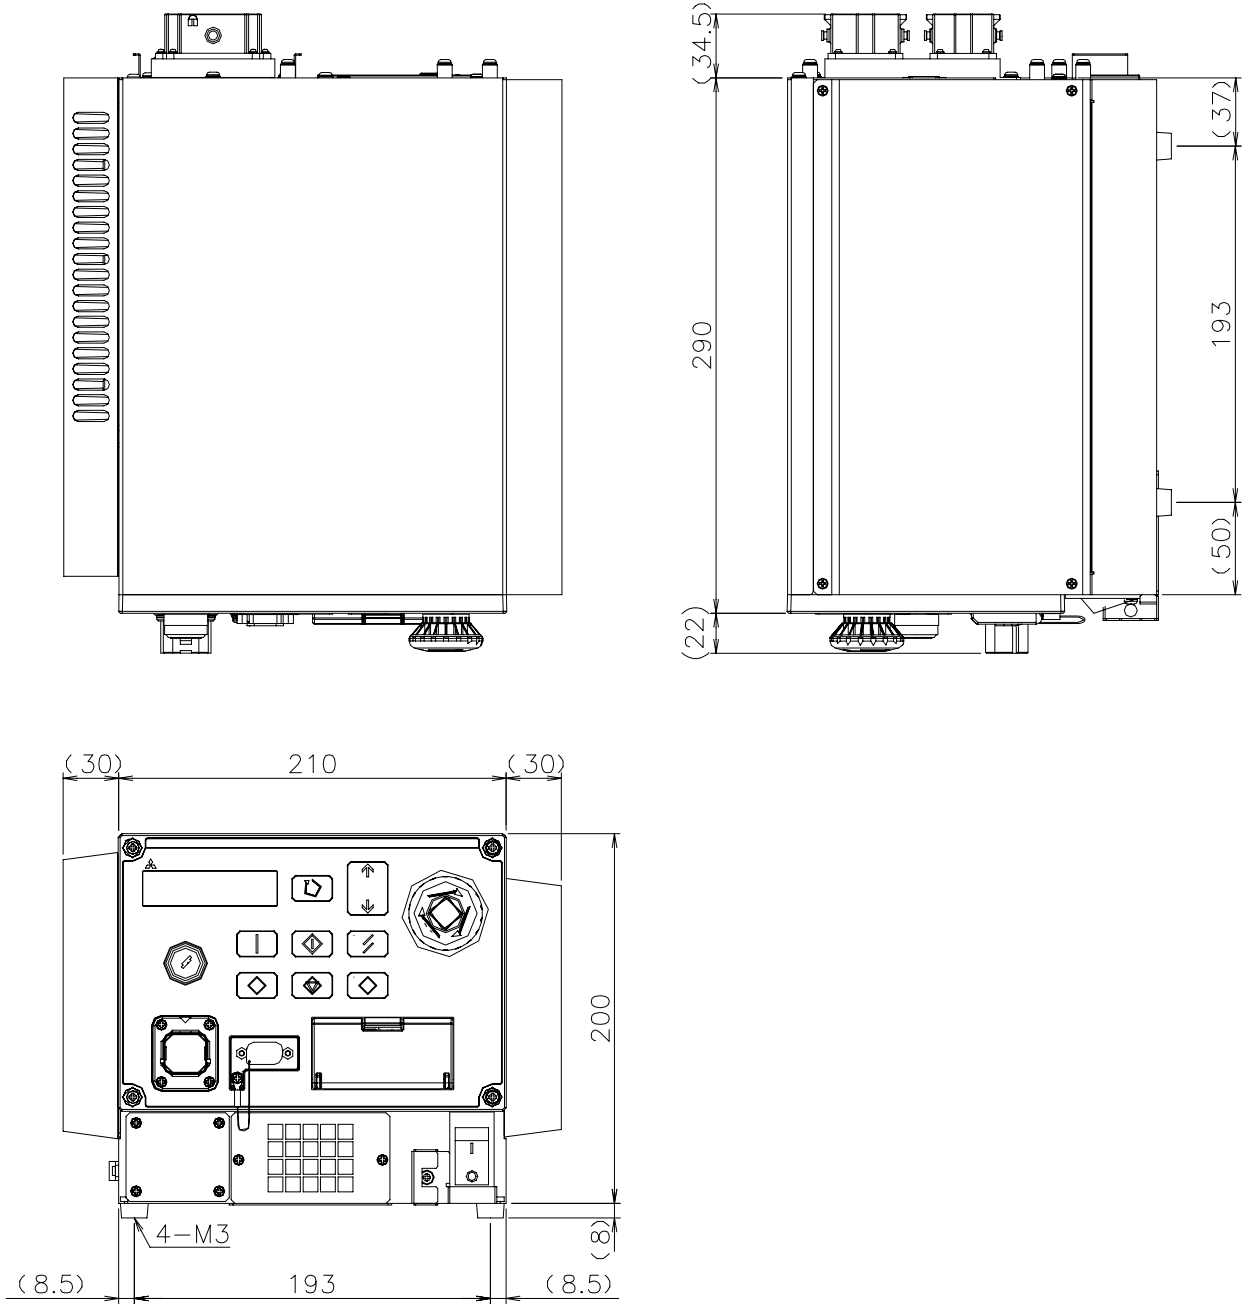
Outside dimensions of controller (CR1DA-700-S12 series)
